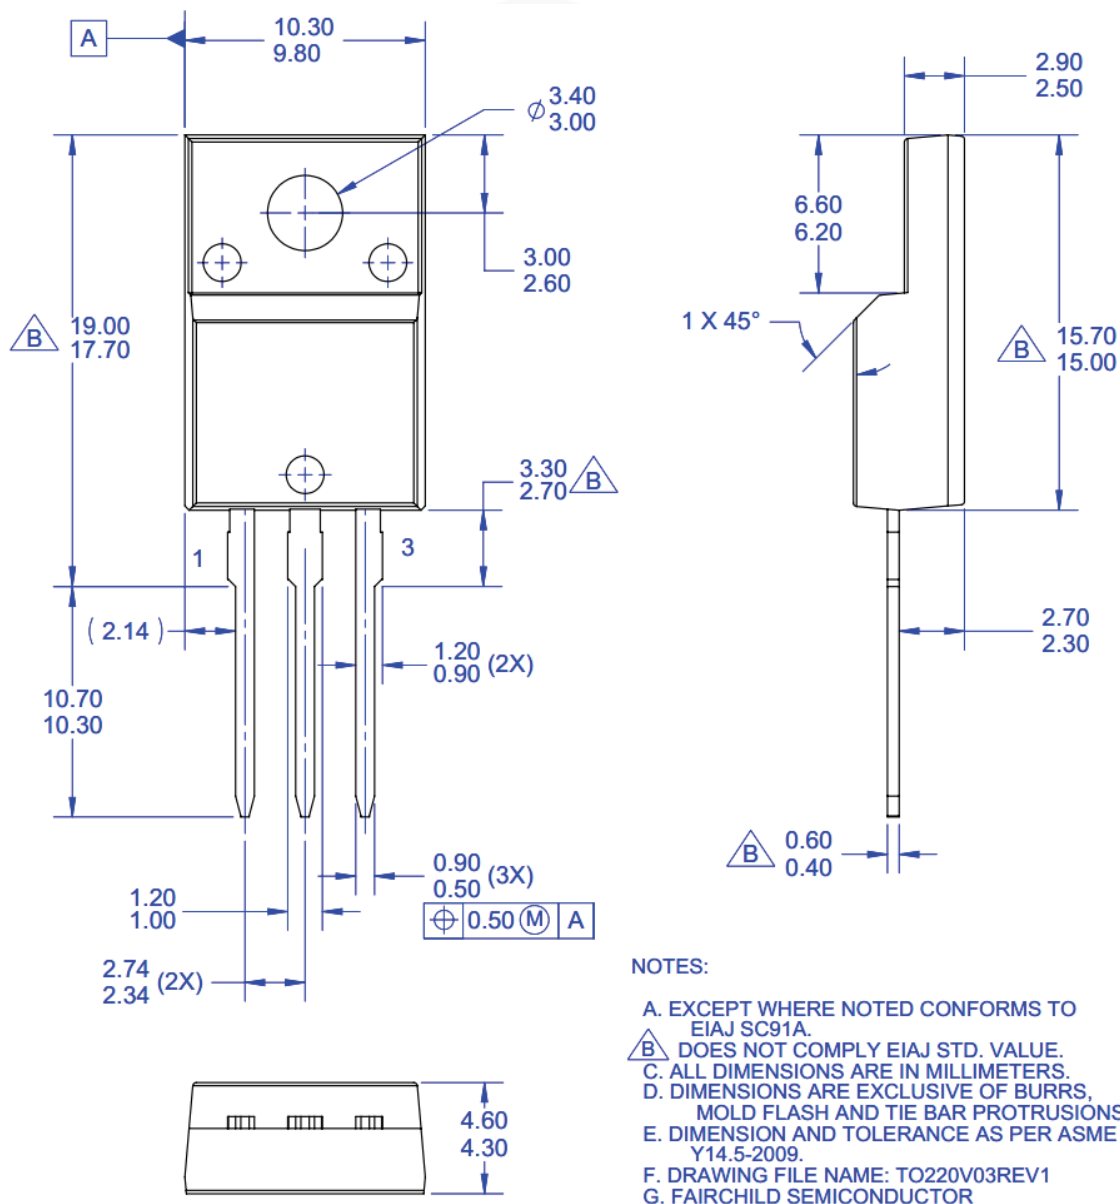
TO220, Molded, 3LD, Full Pack, EIAJ SC91, Takcheong
